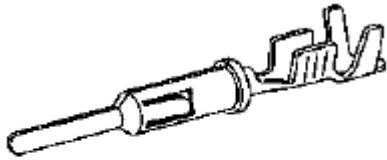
Identifying Round Plug Contact (RK)-2.5 Variant-1-Pin
